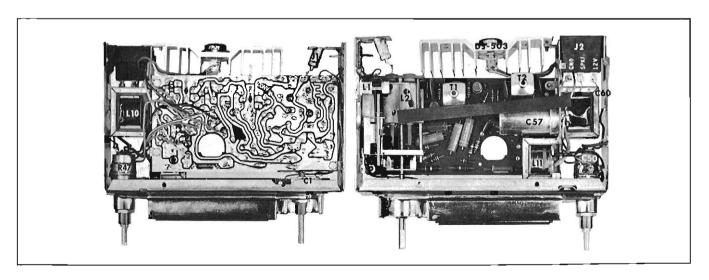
CHEVY II - PARTS LAYOUT CIRCUIT Figure 42 - CHEVY II PARTS LAYOUT TUNER BOARD VIEW - 986248 - RADIO
